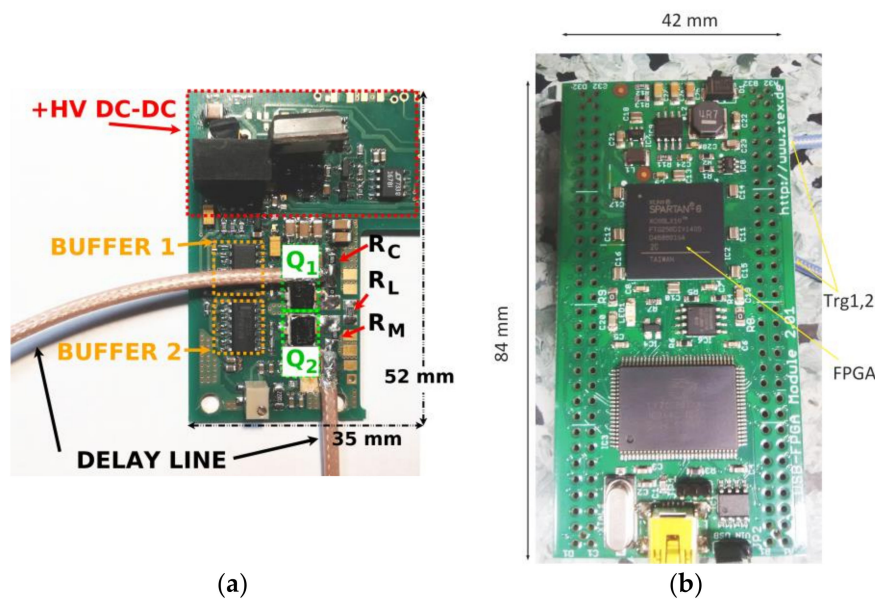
PCBs of the pulsed laser driver system: (a) Dual-FET output stage; (b) Timing circuit (Field-Programmable Gate Array (FPGA)) PCB–ZTEX evaluation board with the Spartan 6 device.
